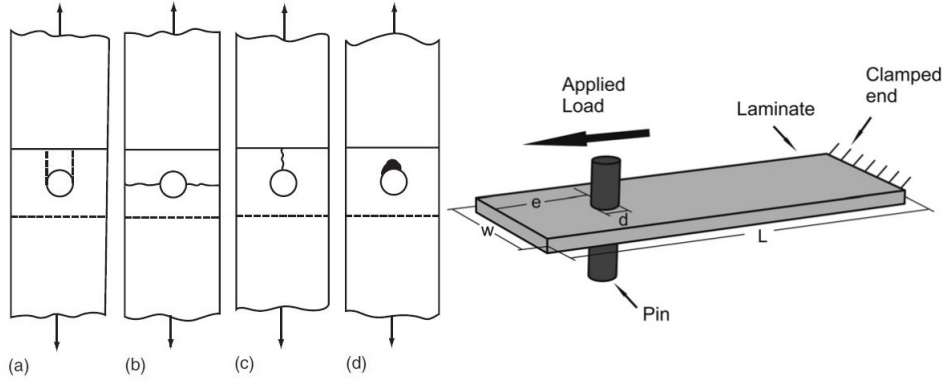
Failure modes in bolted laminates: (a) shear-out (b) net tension failure (c) cleavage (d) bearing failure.
